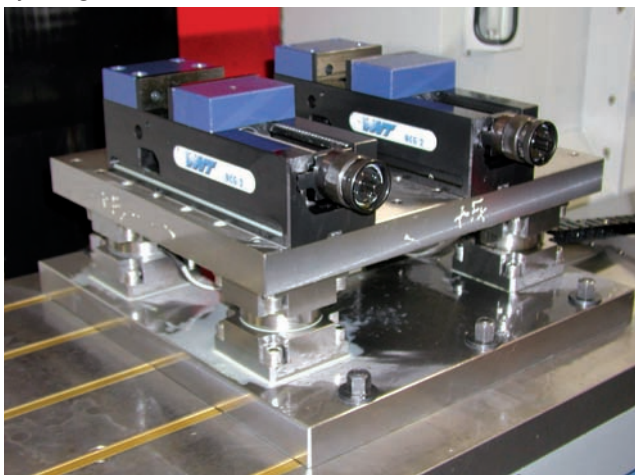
Cutting force dynamometer constructed with four 3-component force links
